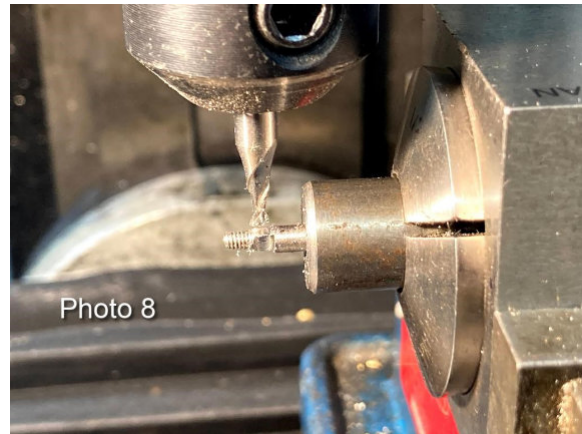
show machining the square part of the stem just below the 2-56 thread. The milling cutter is 3/32. One side is machined, the block is turned a quarter turn, the next side is machined and so on.
